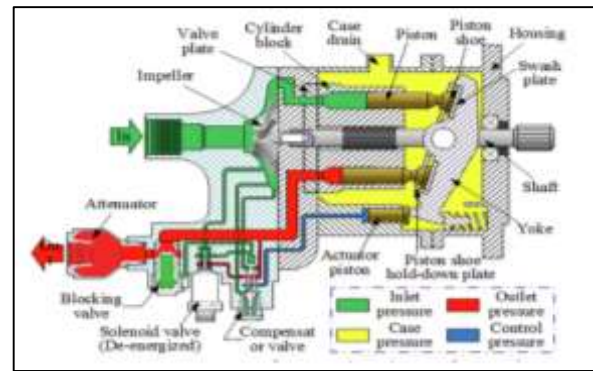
Cross-section view of a typical civil aircraft hydraulic pump [14]
